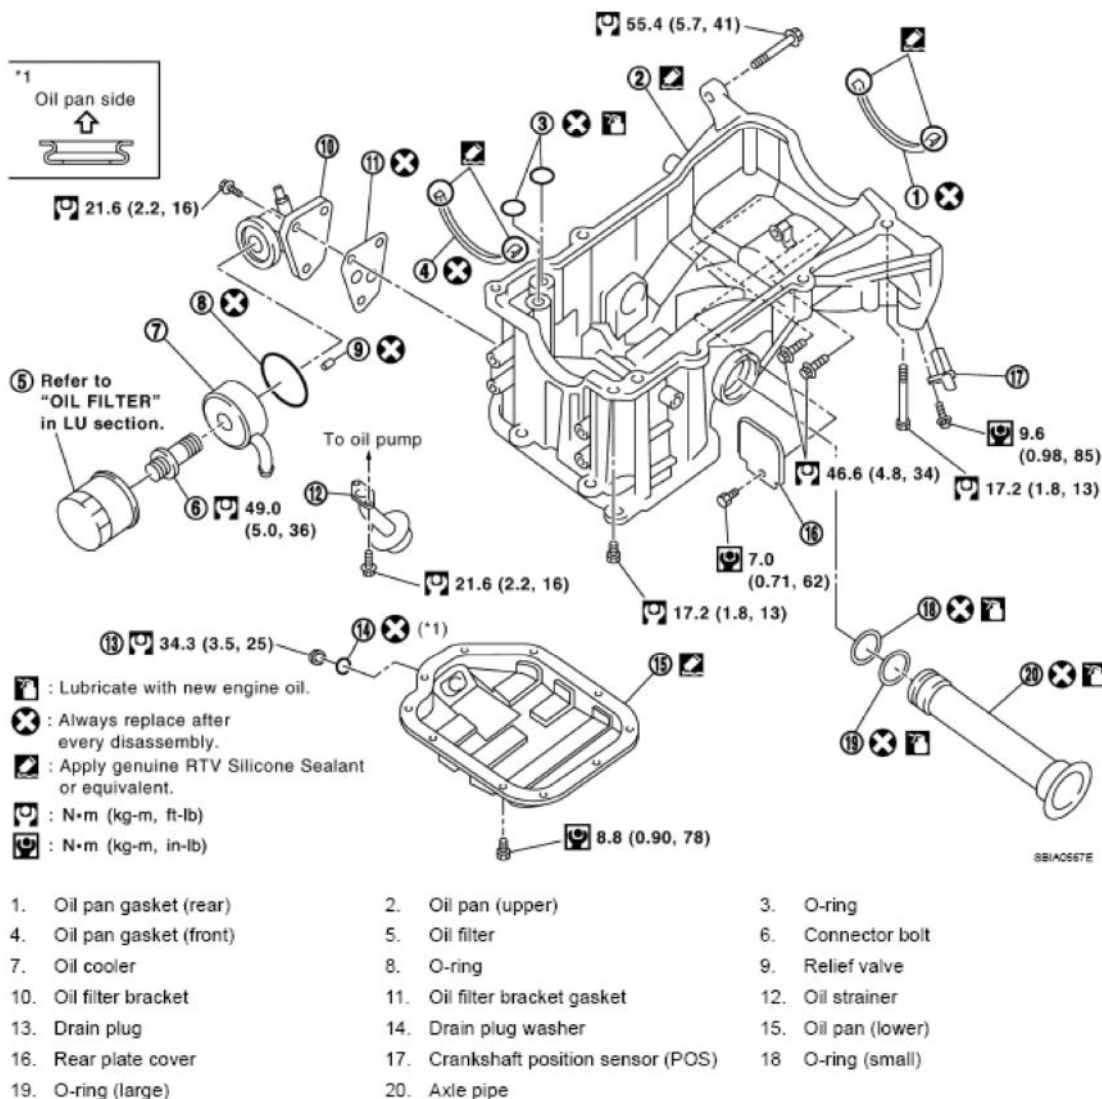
Exploded View Of Oil Pan Components With Torque Specifications (AWD Models)
